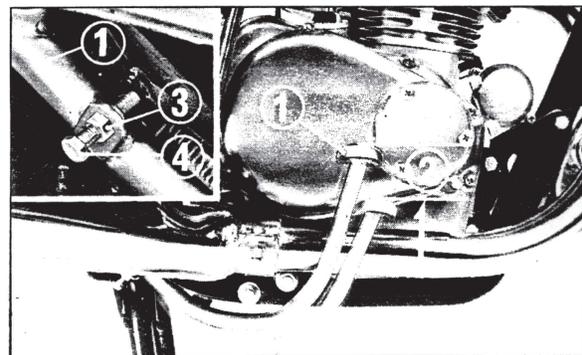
(1) Rear brake pedal (3) Lock nut
